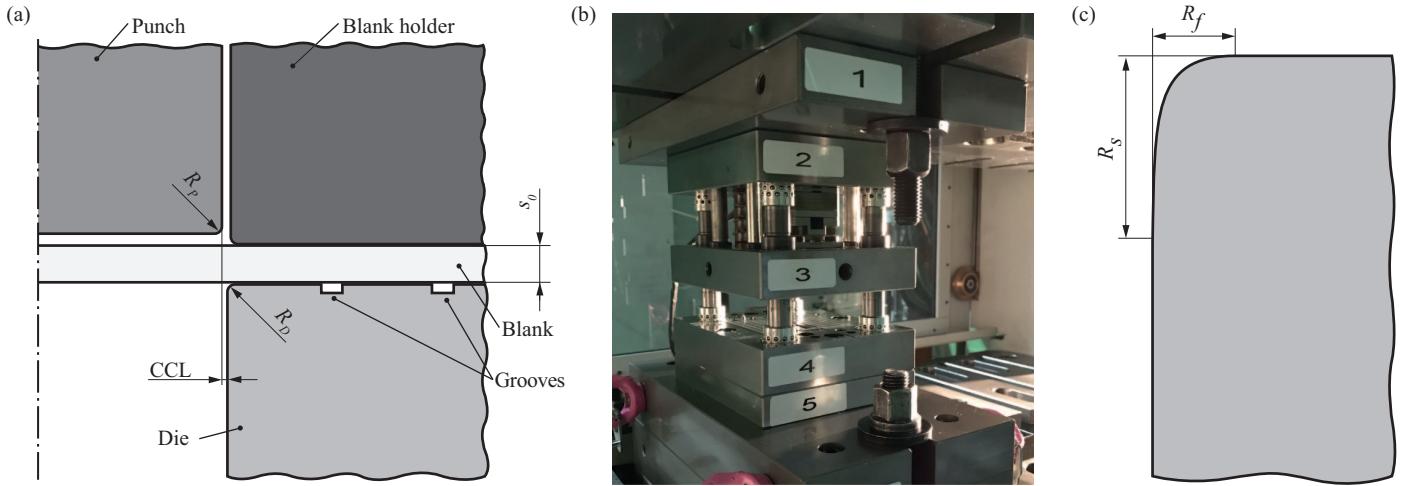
(a), Blanking tool sketch; (b), Blanking tool inside the mechanical blanking press; (c), Cutting edge chamfer
